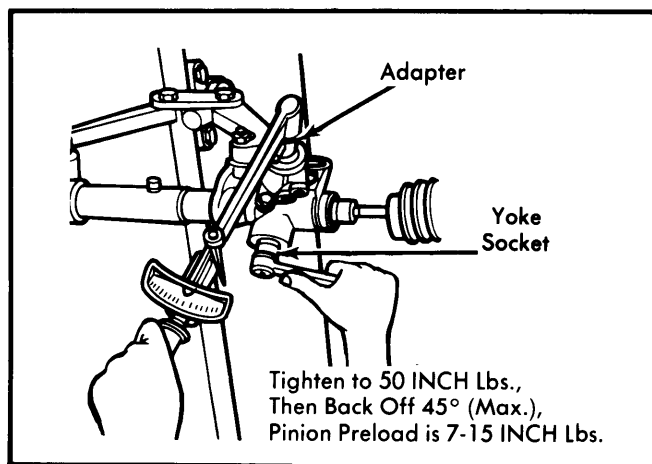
Rack Yoke Bearing Preload Adjustment (All Models Except Escort and Lynx)
